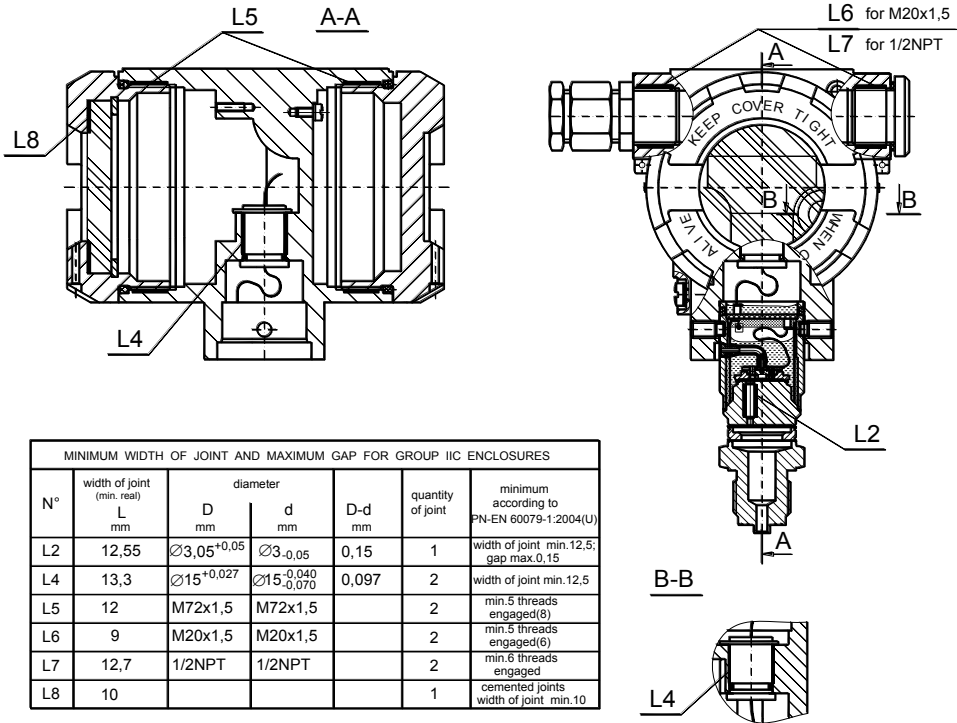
The explosion - proof joints of DPC..., DPR... transmitters.
